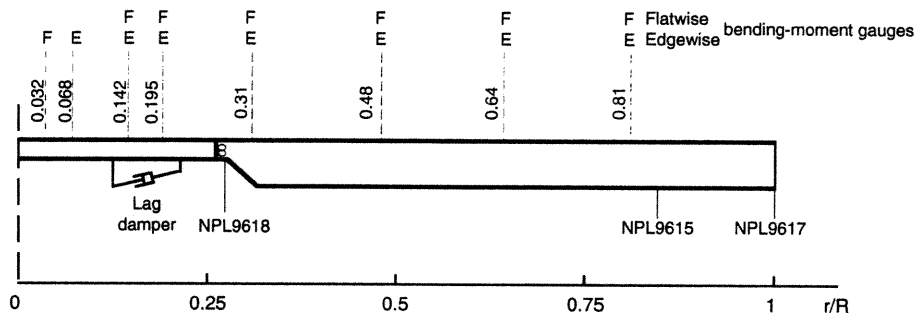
Locations of flatwise and edgewise bending-moment gauges, airfoil sections, and lag damper.
